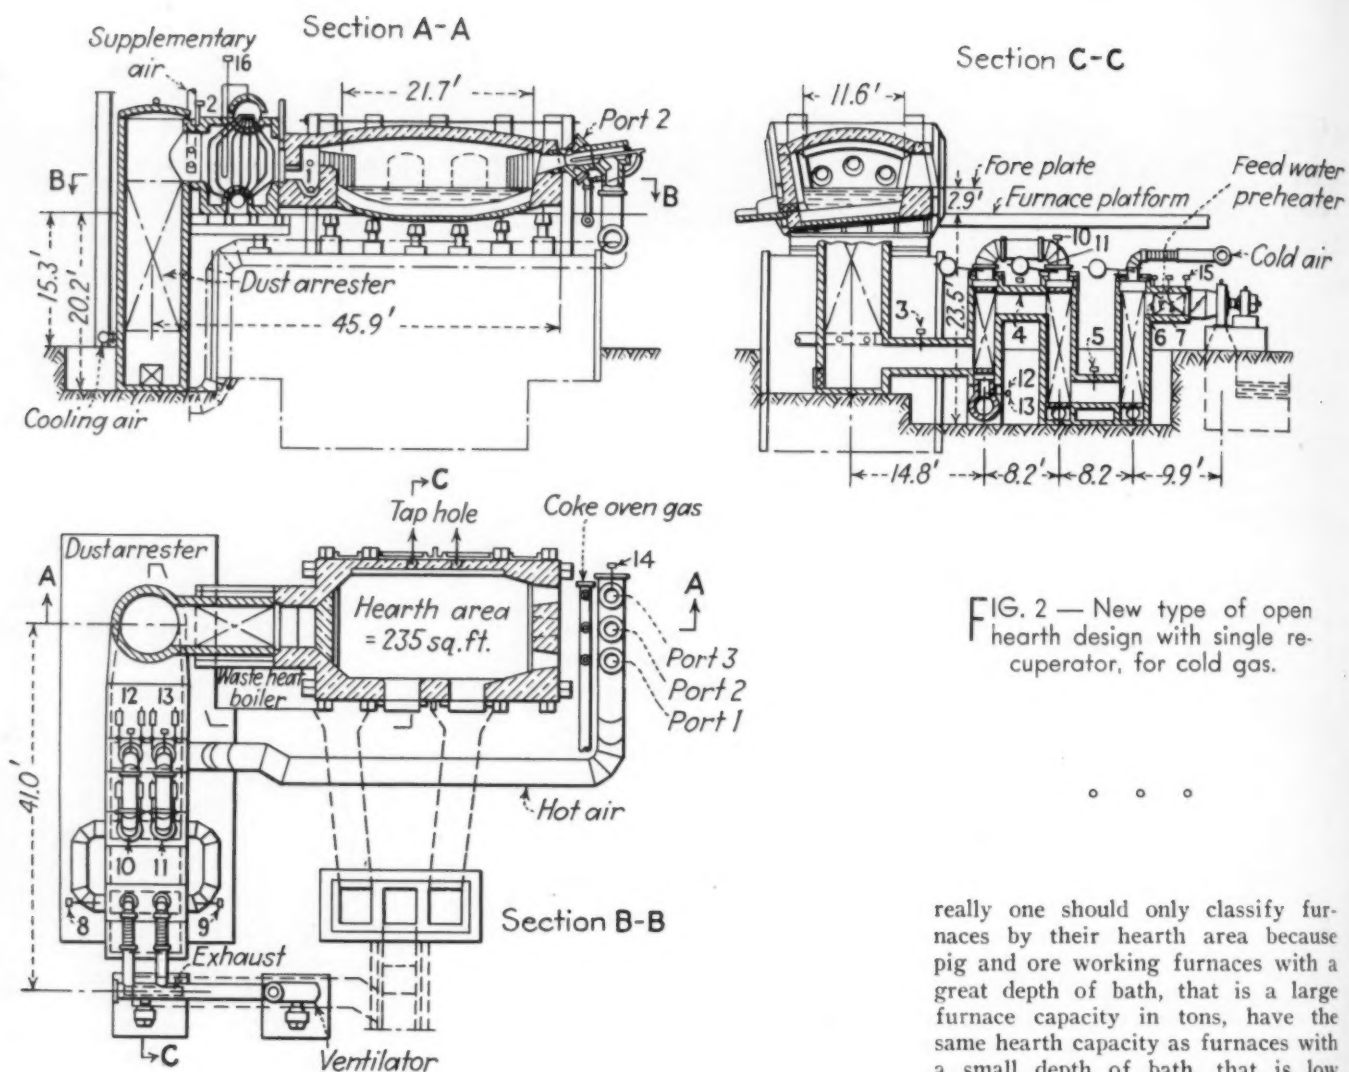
New type of open hearth design with single recuperator, for cold gas.
